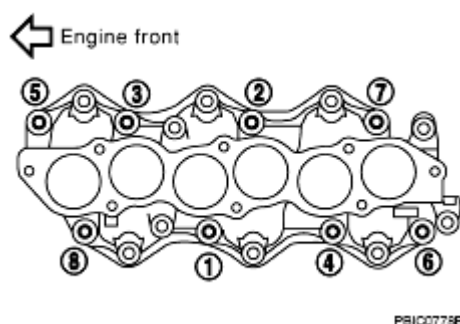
Identifying Intake Manifold Bolts Tightening Sequence
